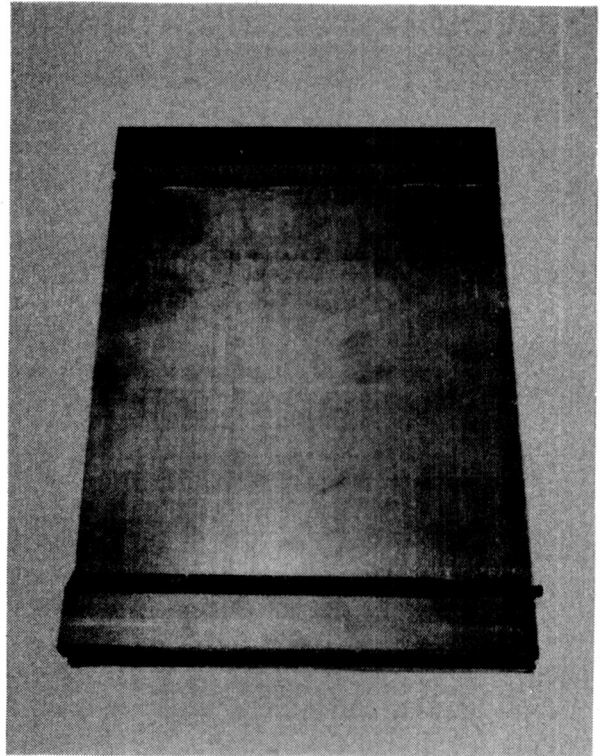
Heavily Loaded Sandwich Control Specimen EX482/483-4
